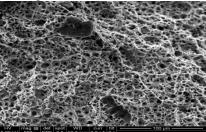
Fracture surface analysis of tensile tested specimen at 500X
